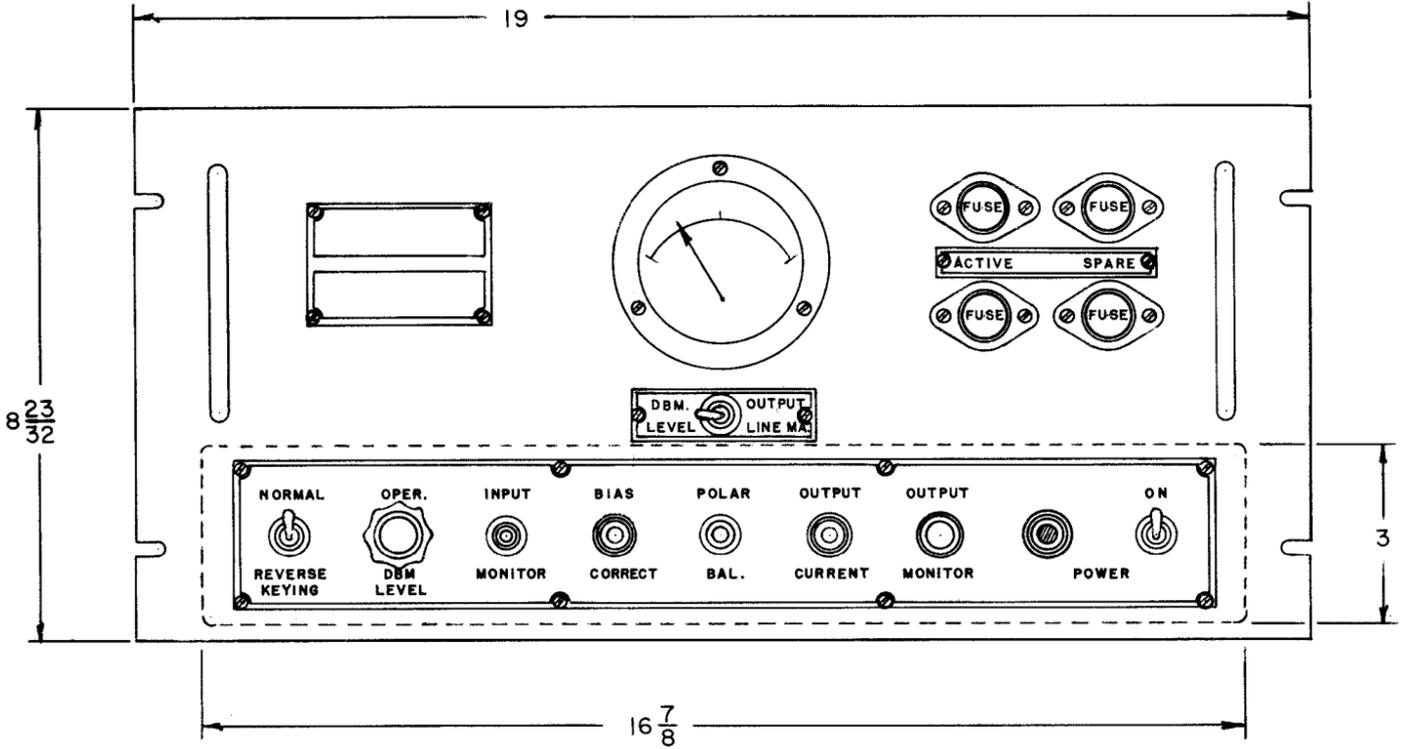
Receiver, Carrier Telegraph R-466/UC, Outline Drawing
